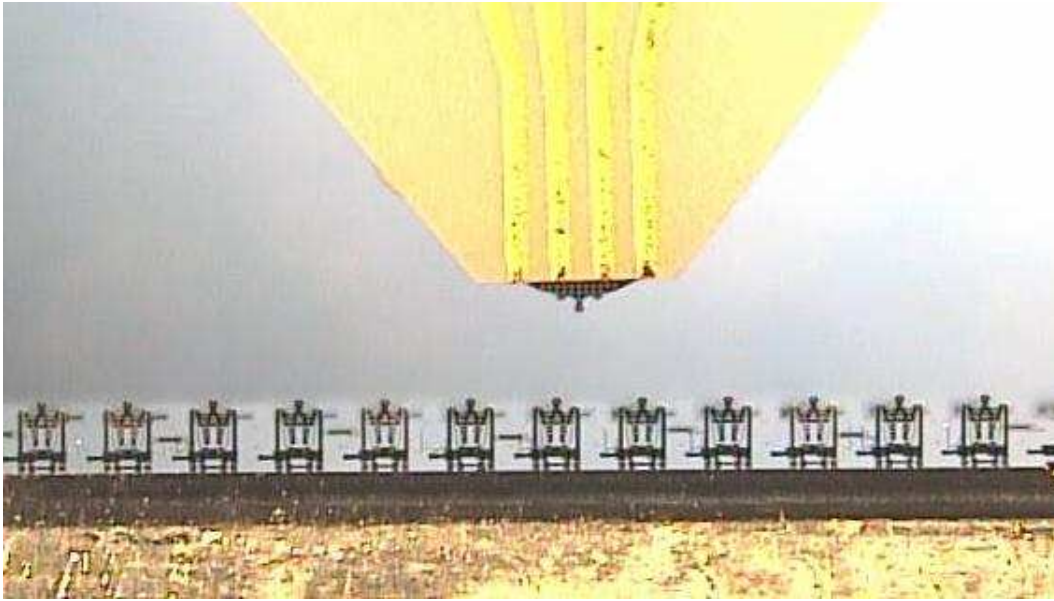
A row of standing passive Zyvex jammers obtained by calibration and assembly scripting.
